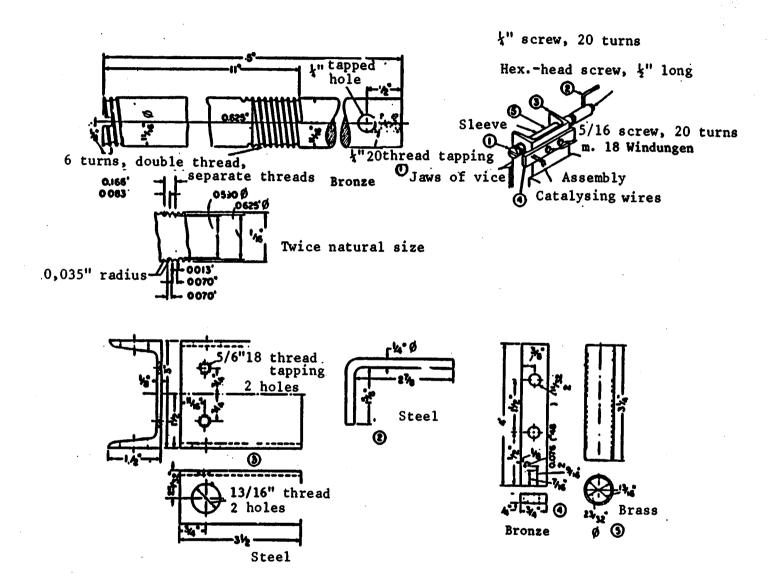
SPINDLE FOR WINDING CATALYSING COILS
